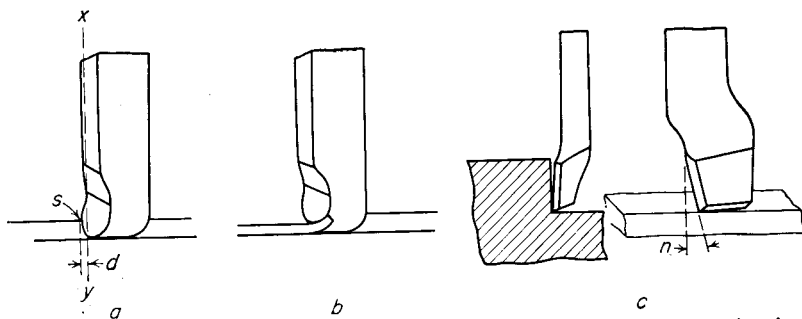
Cutting action of tool when machining a plane surface. Note in view (a) the line  $xy$  is parallel to the base of the tool and therefore the tool has no front rake. Note also that since the cutting edge is given side rake, the start of the cut is made at  $s$  and the distance  $d$  is traversed before the full depth of the cut is taken; thus the tool enters the work gradually and prevents the shock of having the full cutting edge strike the metal at once. The way in which the chip curves is shown in (b). In (c) is shown a side tool with the cutting edge ground flat to take a finishing cut, say,  $\frac{1}{4}$  in. or more wide. Note the angle of shear  $n$  to give an easy start and finish of the cut. A side tool, ground in this way, is much used in shaper and planer work for finishing cast iron.
